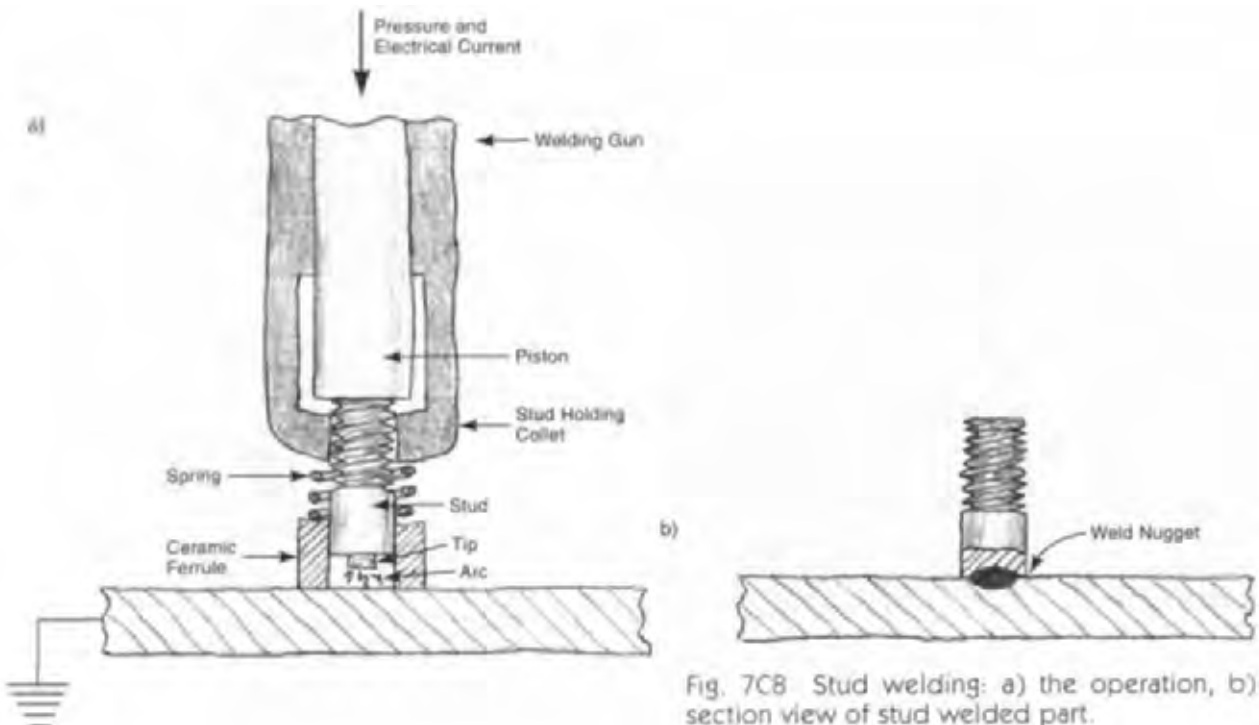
C8 Stud welding: a) the operation, b) section view of stud welded part.
